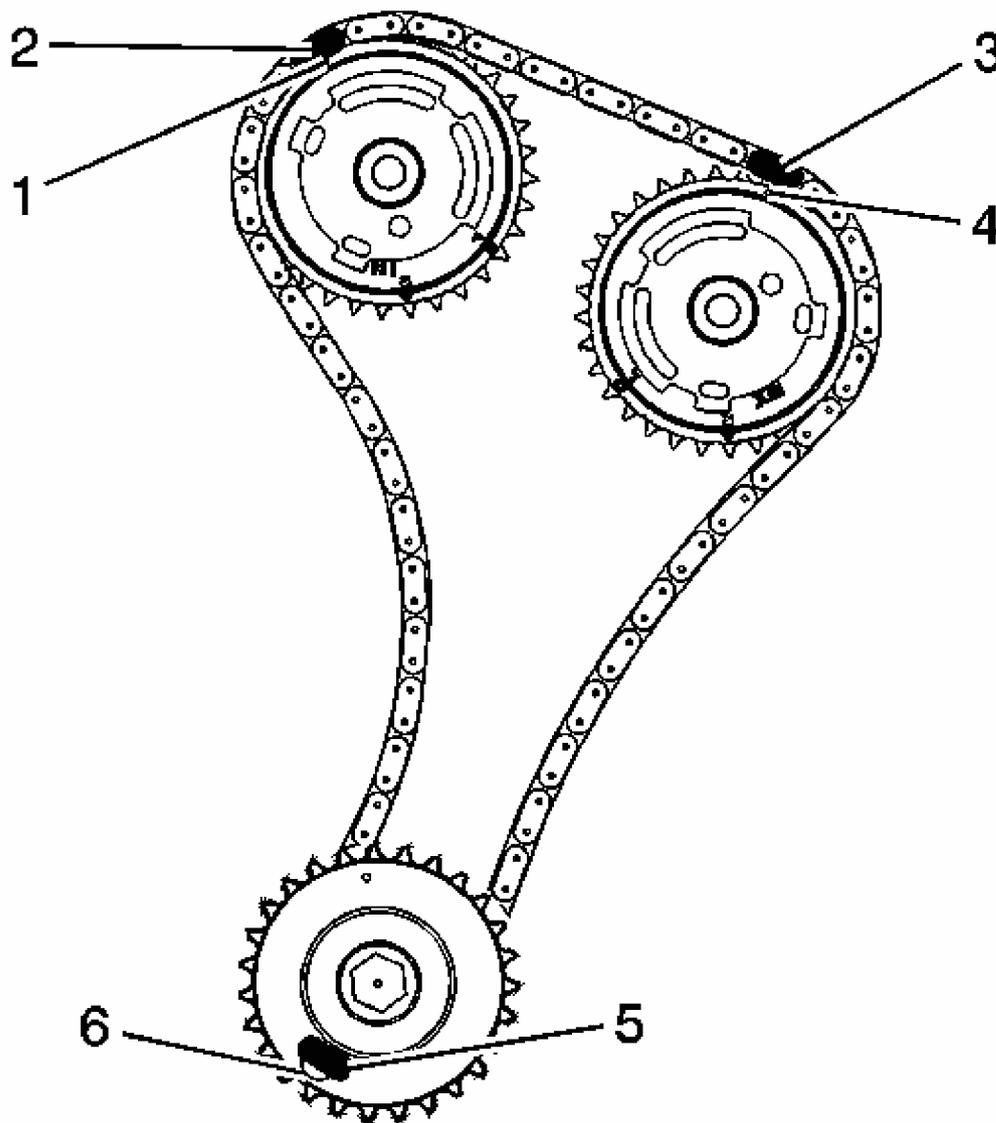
Locating Left Secondary Camshaft Drive Chain Timing Marks
